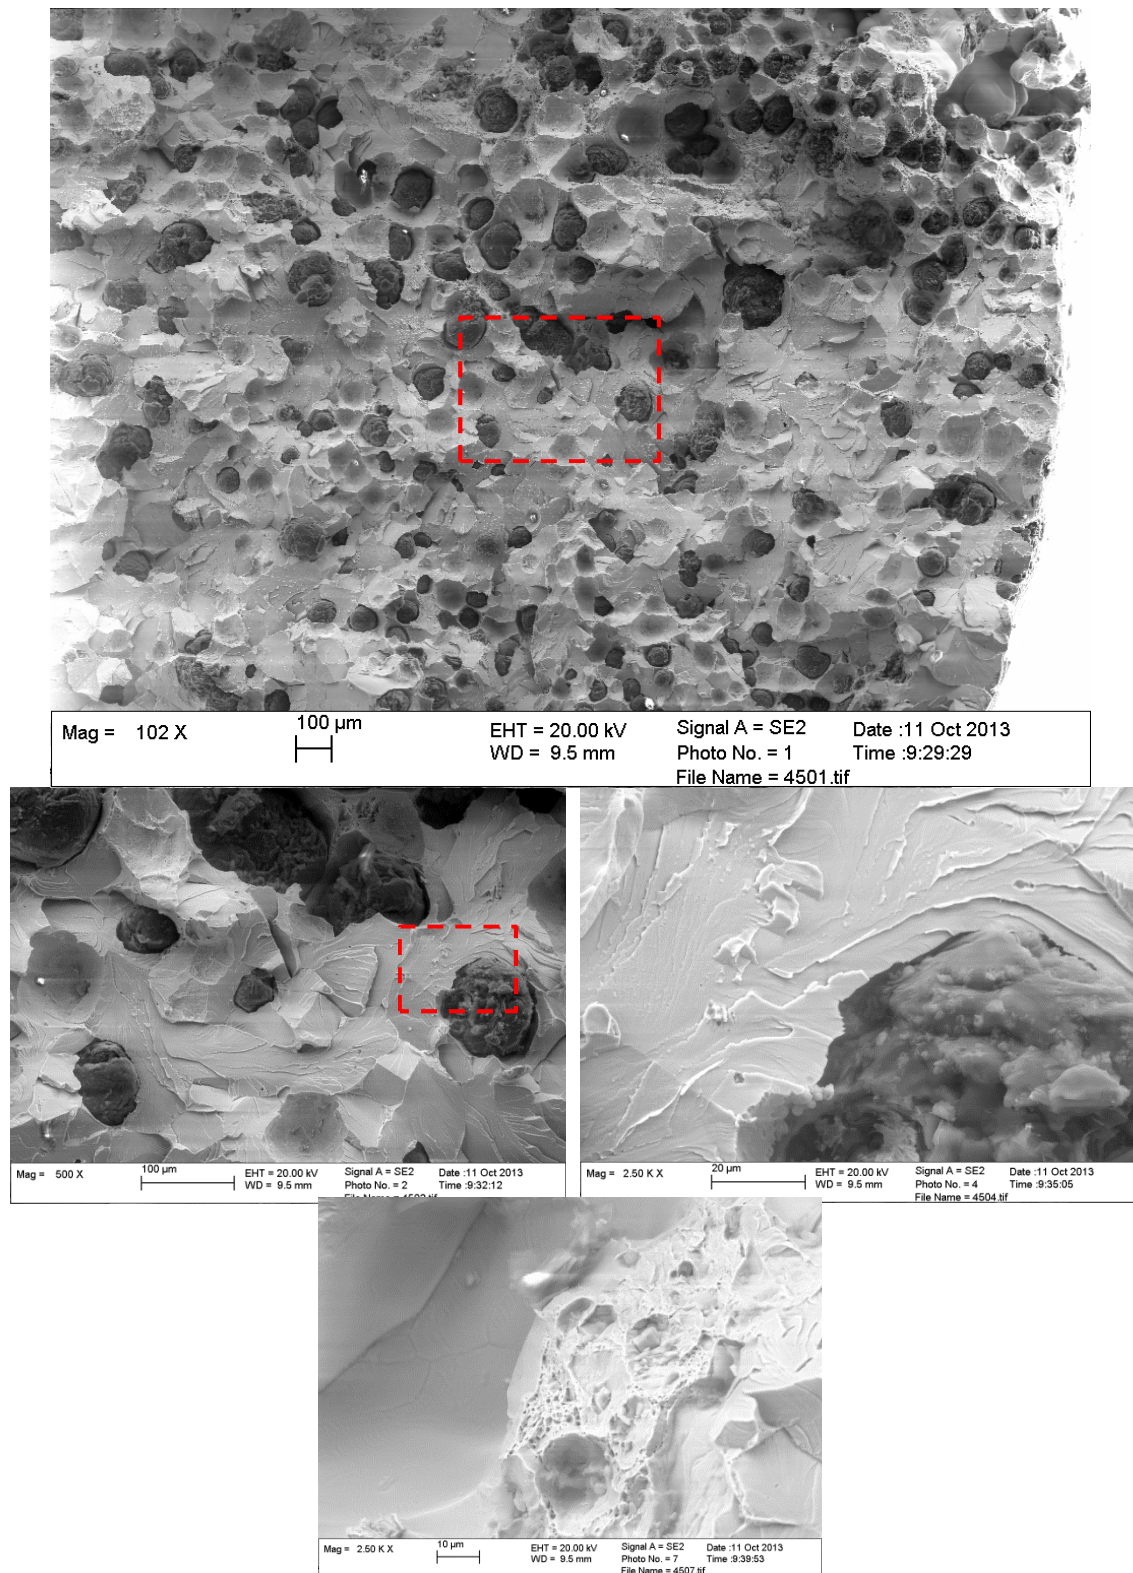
Fracture surface taken from Specimen 17248 tested in uniaxial tension showing an overall picture in (a) and close-ups in (b). The scale in each picture is indicated by the scale bar. The failure in the test was triggered by casting defects and therefore failure occurred at low strains.
